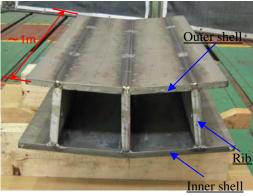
Trial welding of 1m long double shell construction (inboard straight part)
